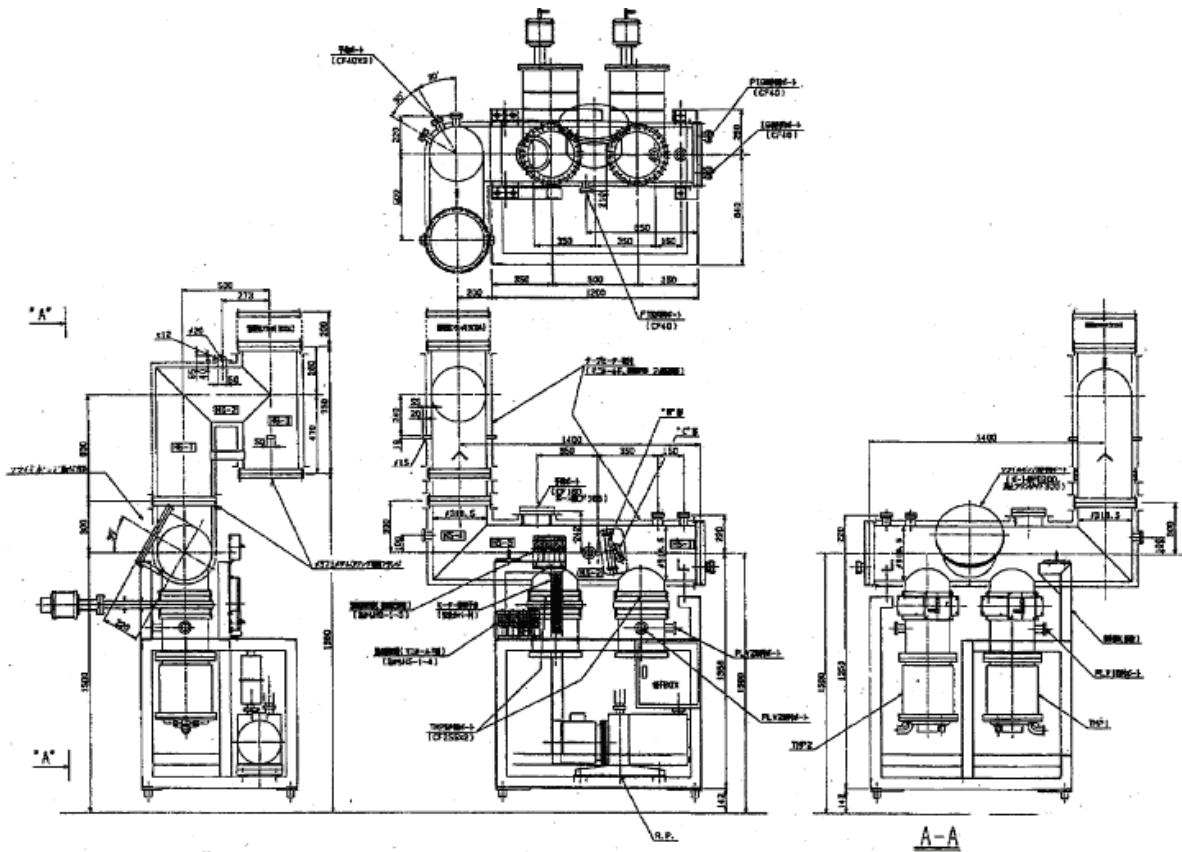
Vacuum pumping unit for the CHS.
